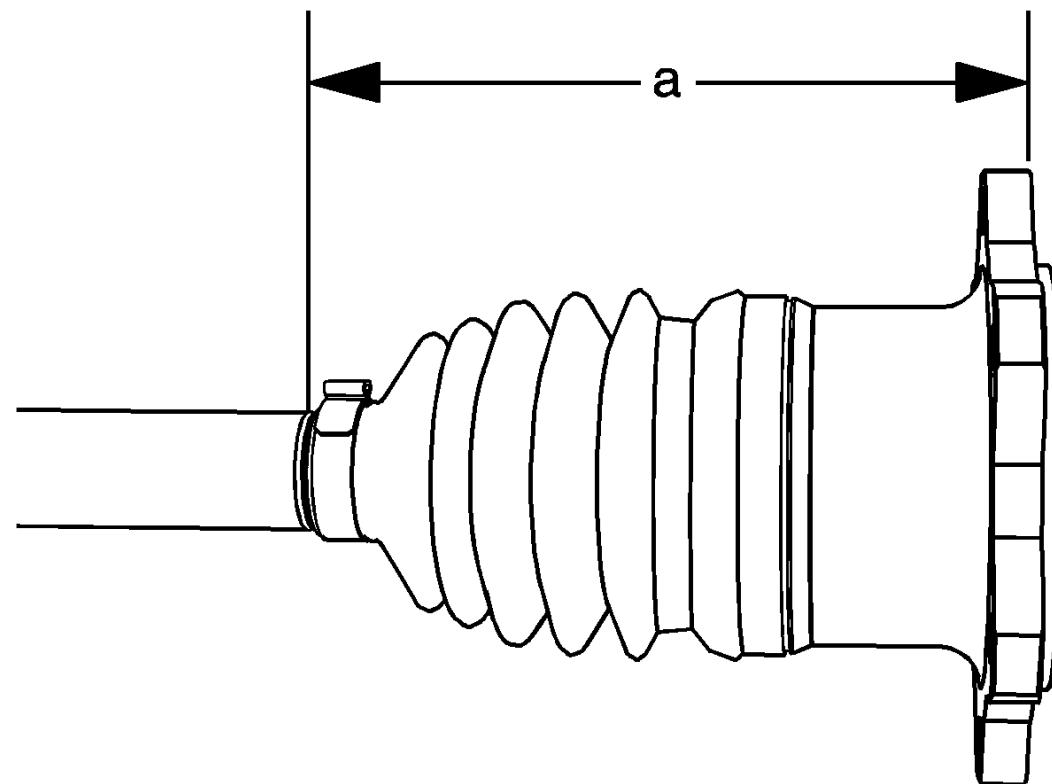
Measuring Axle, Boot & Tripot Housing Length
